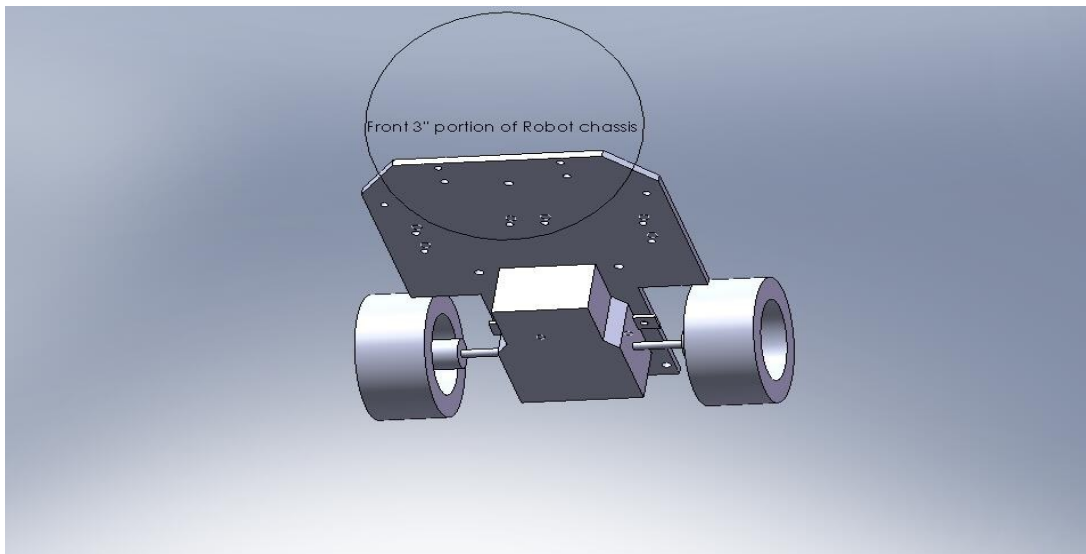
Front-bottom view of basic main-plate and gearbox-with-wheels assembly.
